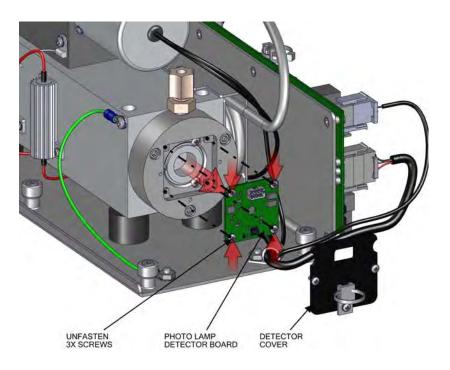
Replacing the Photo Lamp Detector board pt 2
